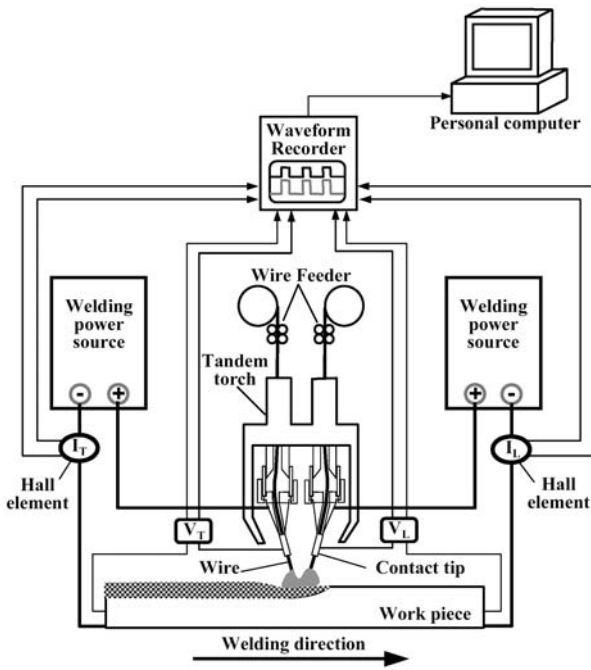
Schematic diagram of tandem pulsed GMA welding system
